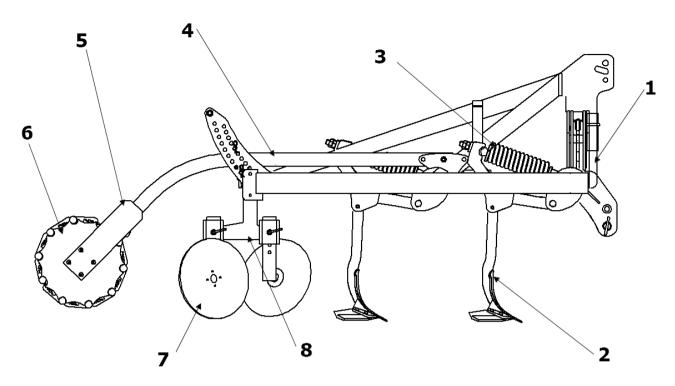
KUS S unit design: 1 - frame with three-point hitch, 2 - plough beam, 3 - spring system, 4 - shaft arm, 5 - shaft clamp, 6 - shaft, 7 - levelling disc, 8 - levelling disc holder.
